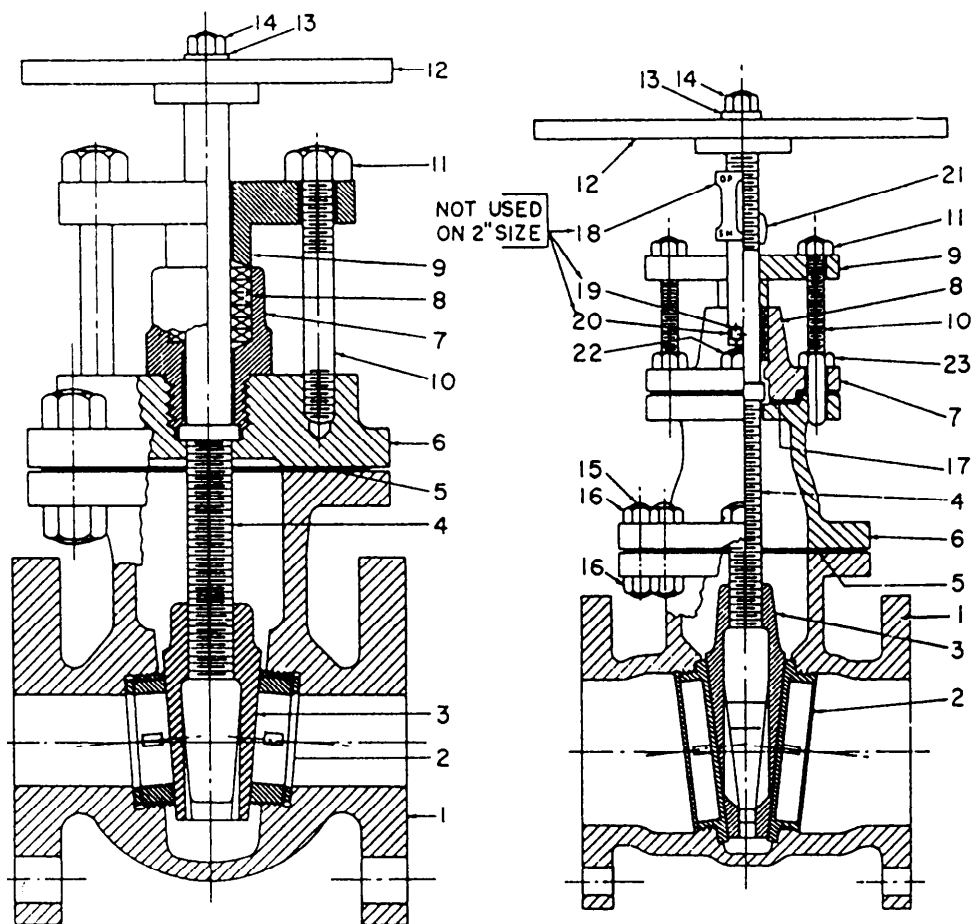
Cutaway view of a gate stop valve (rising stem type).
